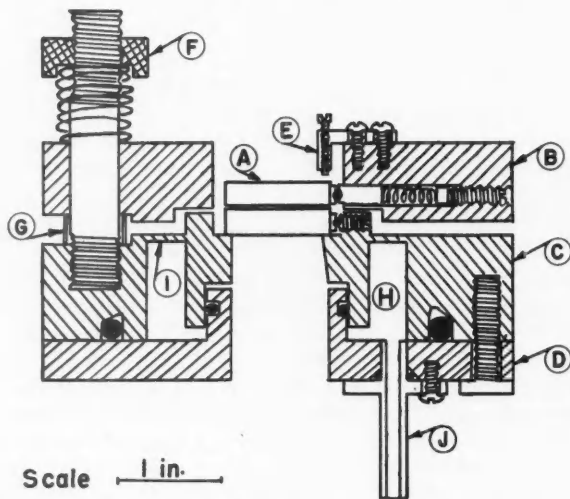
Cross-sectional view of the mechanical scanning mounting for the 1-in. Fabry-Perot spectrometer. A, Fabry-Perot plates; B, upper (fixed) plate holder; C, lower (movable) plate holder; D, air space cover; E, coarse adjustment screw (3); F, fine adjustment screw (3); G, invar spacer (3); H, air space; I, annular membrane 0.045 in.; J, air inlet.
